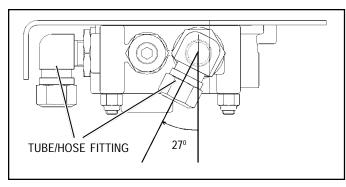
TP-5 TUBE/HOSE FITTINGS (TOP VIEW)
